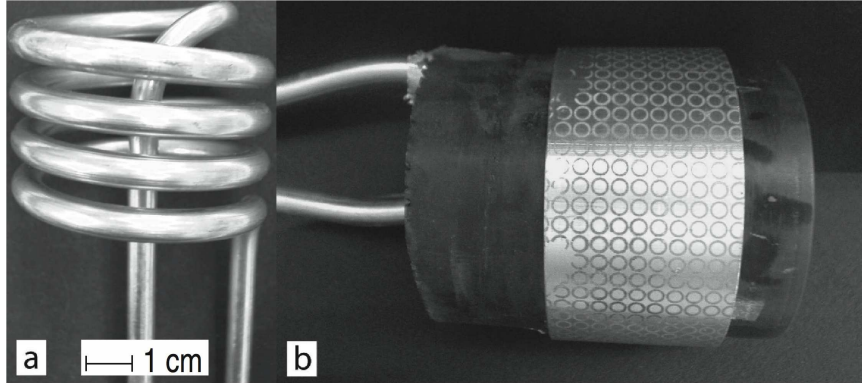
a) The bare 4-turn coil. b) Sample-actuator configuration. The 31.7 mm tall aluminum tube sample is shown fitted around the urethane-coated 4-turn coil.
